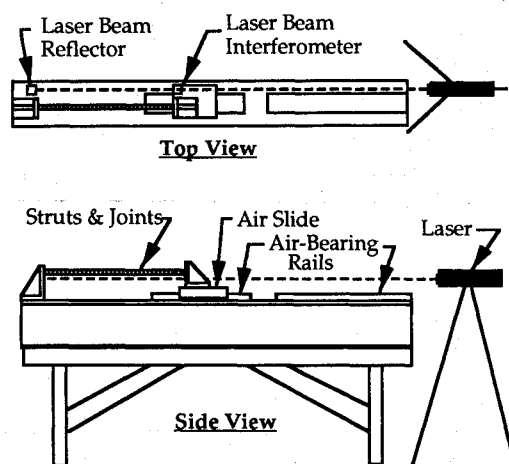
Strut/joint assembly and length setting fixture with laser interferometer setup.
